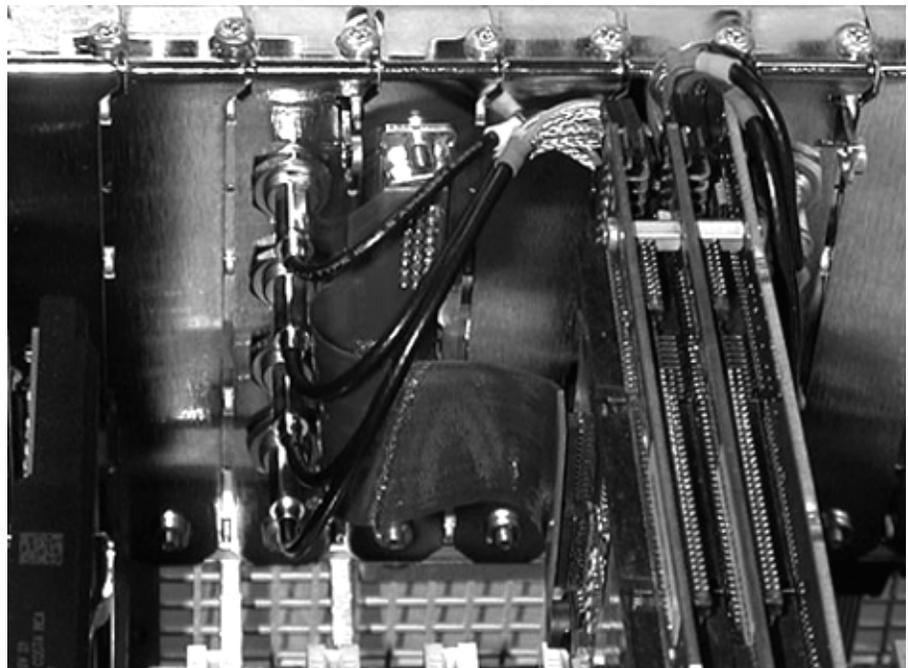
shows the completed installation of the optional DHEI board and rear-panel connectors.
